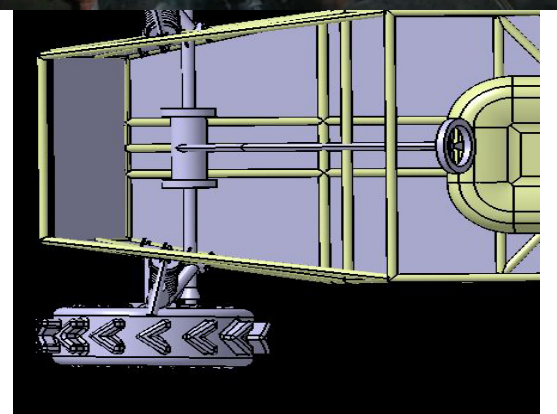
CATIA generated assembly of steering system and assembled steering system
